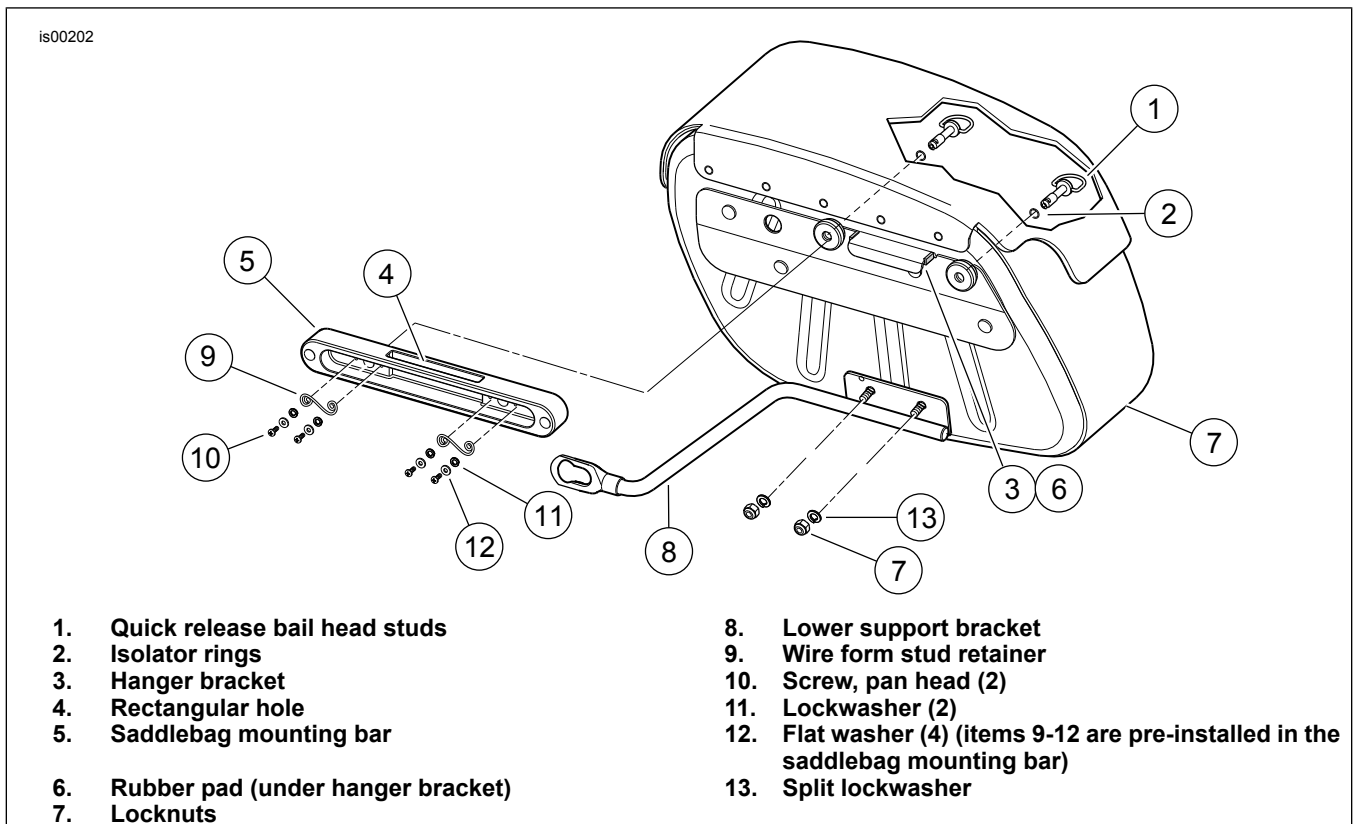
Rear View of Saddlebag and Saddlebag Mounting Bar
